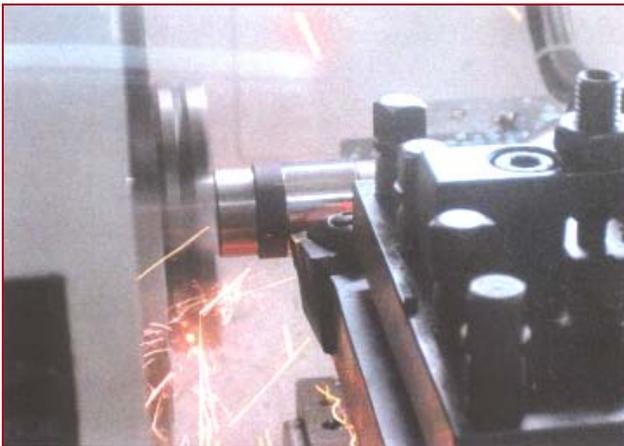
Hard turning process with CBN insert at HARRISON ALPHA 1400 S machine tool
